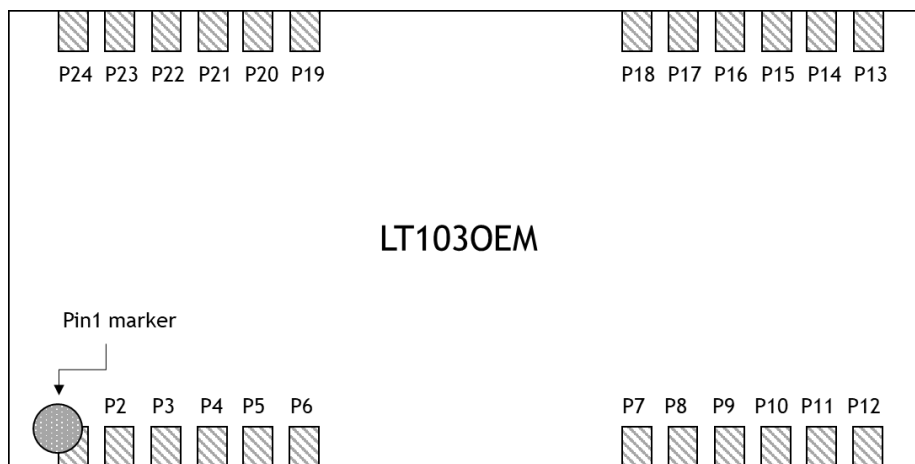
Reference Drawing for Pin Out (top-side, top-view)
